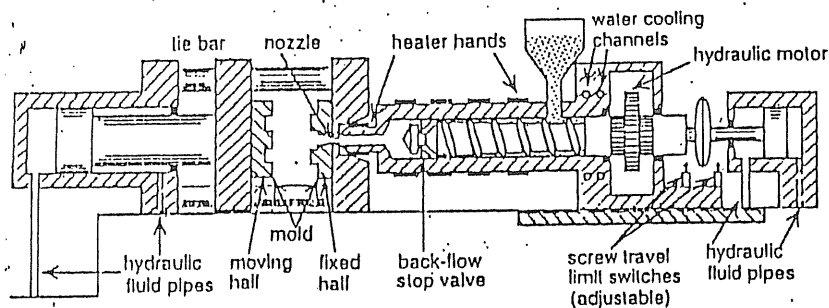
Illustration of a reciprocating-screw injection-molding machine and mold. (Adapted from N. G. McCrum, C. P. Buckley, and C. B. Bucknall, *Principles of Polymer Engineering*, Oxford University Press, Oxford, 1988, by permission of Oxford University Press).
